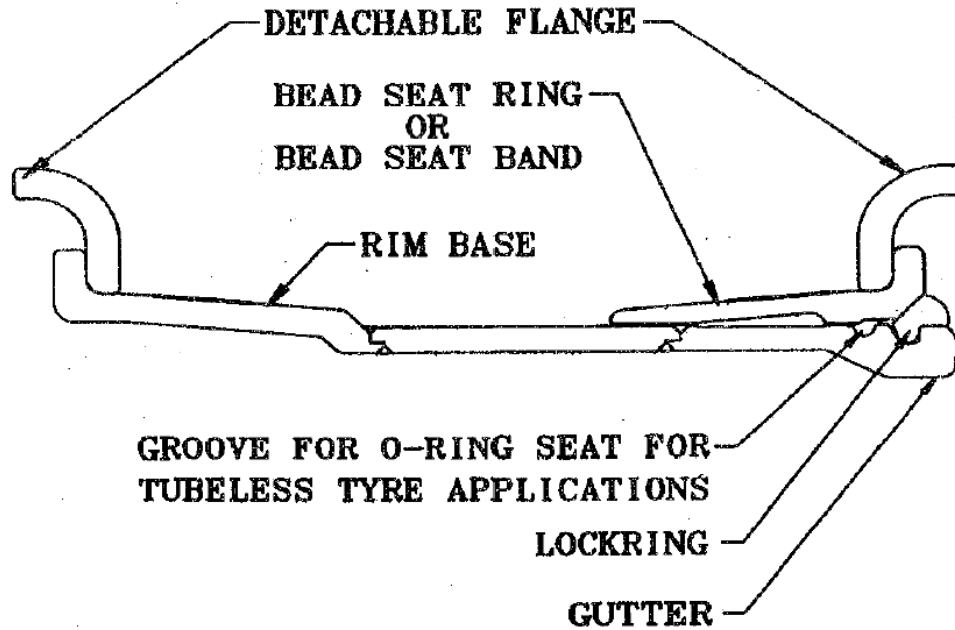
FIVE-PIECE RIM NOMENCLATURE
